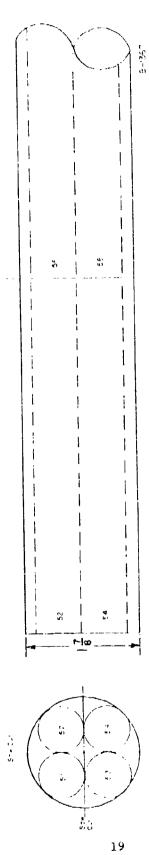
SPECIMEN LAYOUT FOR UDIMET 710 FORGED BAR
